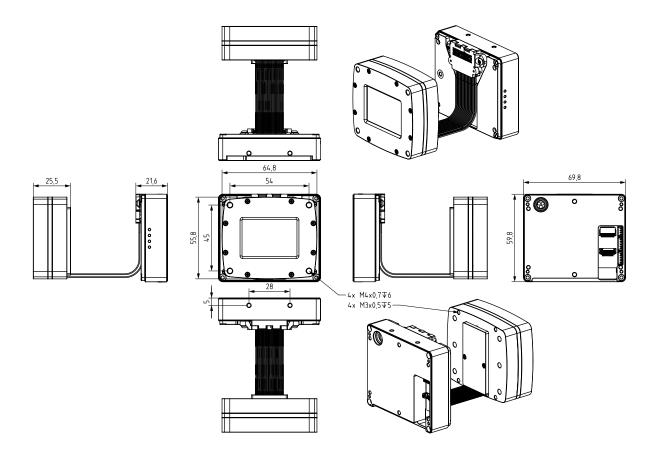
Dimensional drawing of MX610XR-SY-FA-GO/-CSI with detached sensor sub-assembly
